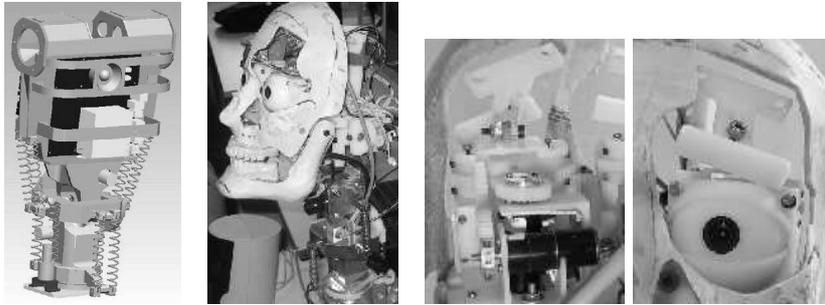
(a) Engineering drawing of the upper body of the humanoid robot with integrated main boards, loudspeaker and the 3DOF hip with supporting springs (b) This image shows the assembled head and neck including the fourth neck joint (c) Mounted eye construction from the backside and (d) the frontal view with artificial skeleton
